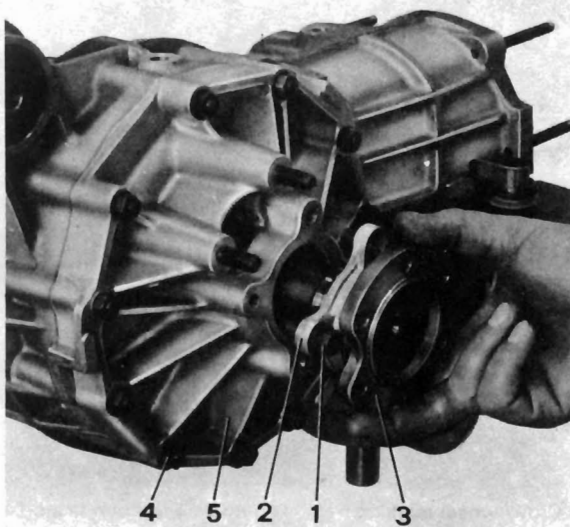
Removing side covers and inner driveshafts (Sec 10)
